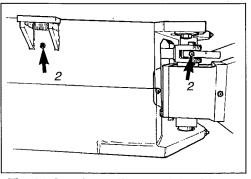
Steering cylinders, right side 2 Lubricating nipples, cylinder brackets
